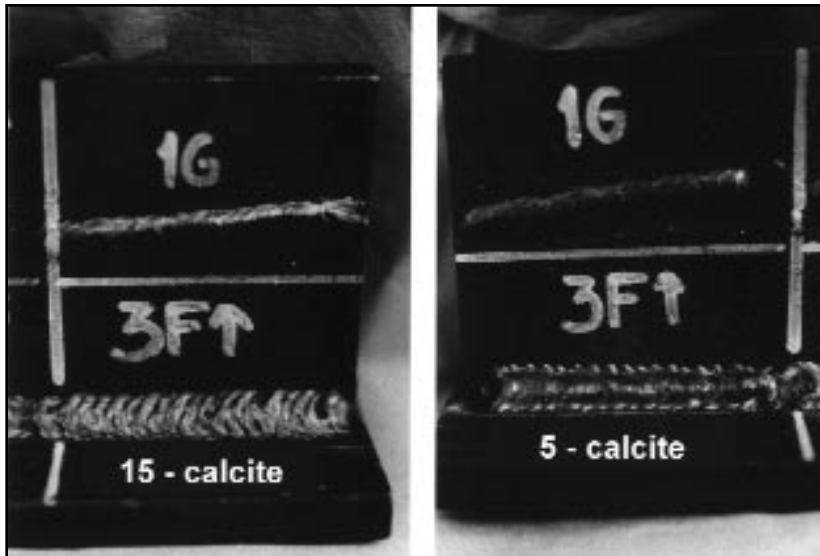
Beads obtained in vertical uphill position welding with AC.
